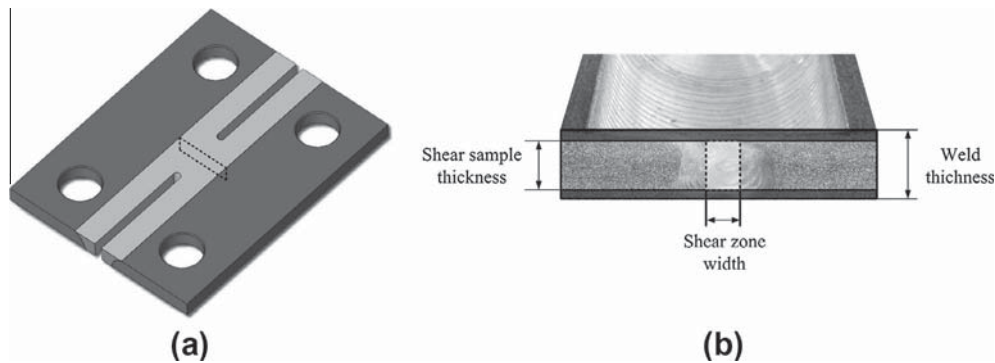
Weld shear test sample scheme (a) and cross-section (b).
